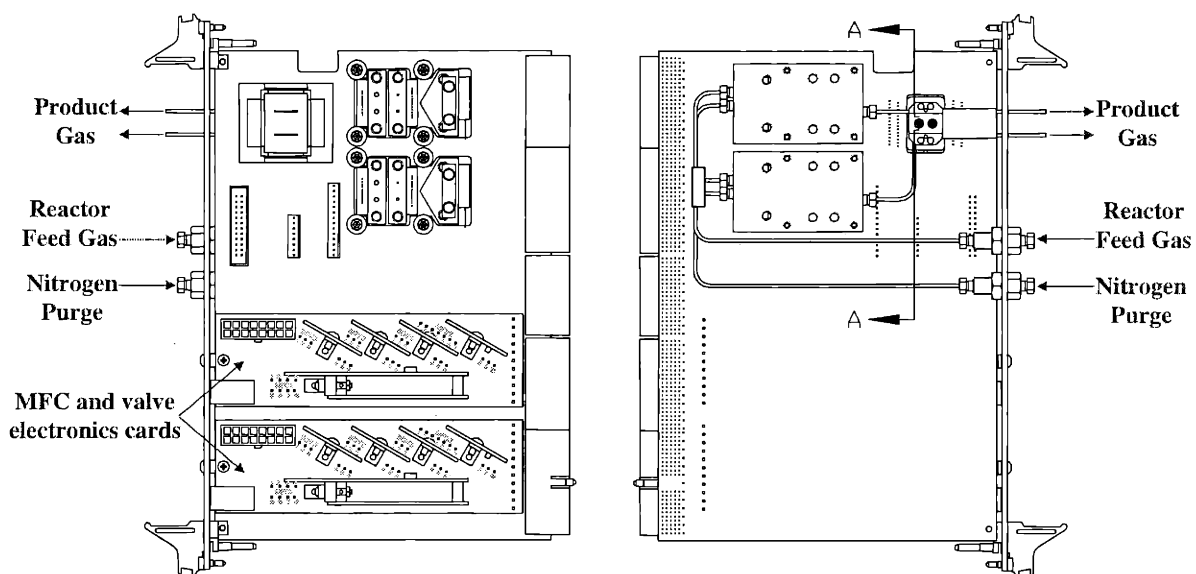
Top (left) and bottom (right) views of a reactor board showing the Redwood Microsystems MFC/valve manifolds with electronics, the reactor mounted in a DieMate socket, and the piping scheme.
